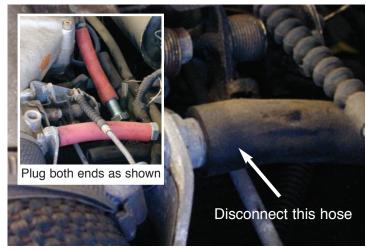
Disconnect black bose on side of throttle body and plug both ends as shown.
